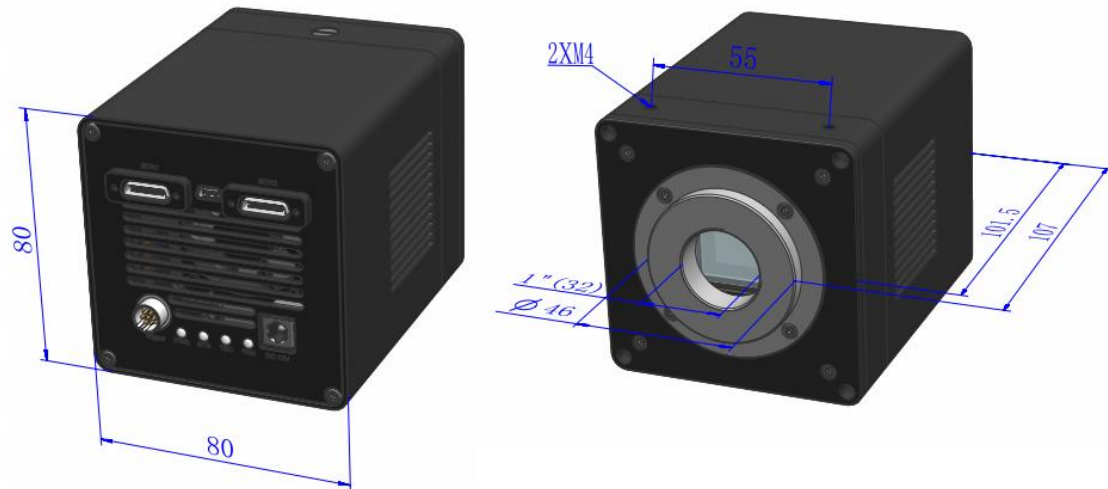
SC2020UV-ITR-CL100 dimensions (mm)
